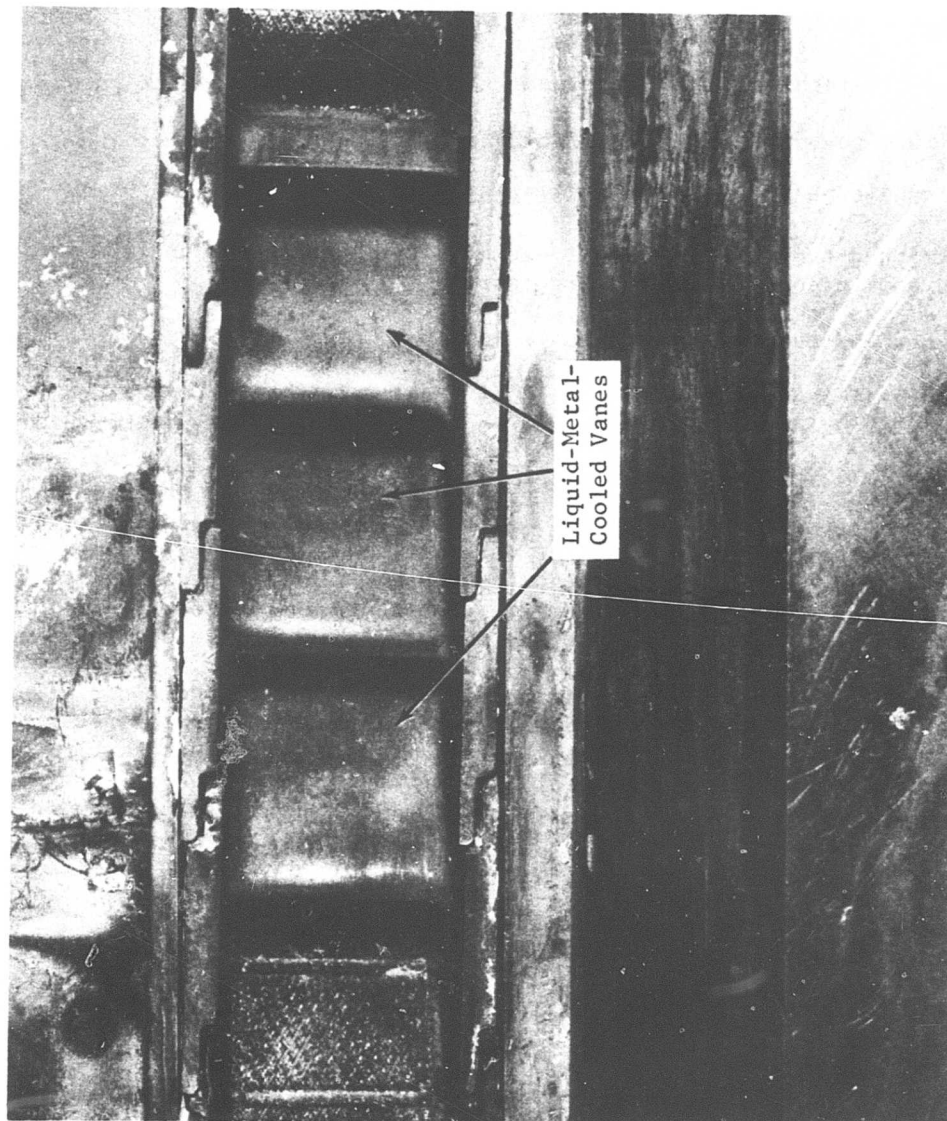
Post-Test Suction-Side View of Nozzle Assembly.
